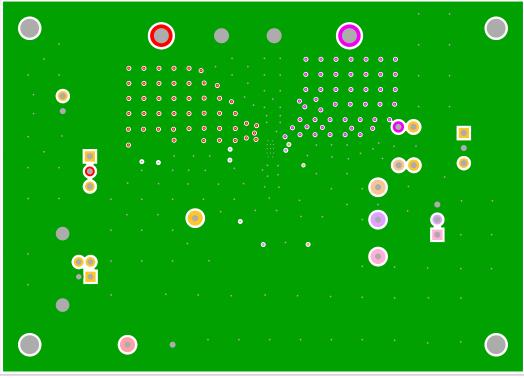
BOTTOM LAYER SOLDER SIDE
